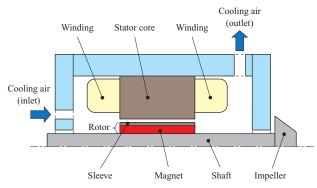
Schematic cross sectional view of high speed rotating machinery
